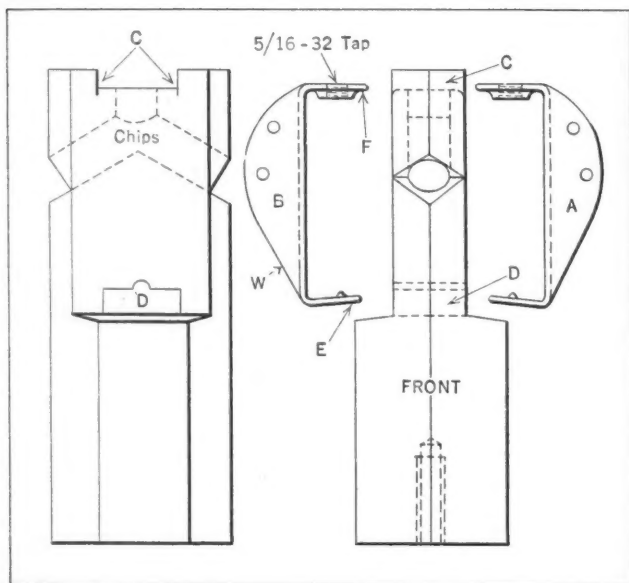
Fixture Designed for Feeding from Both Sides Alternately
